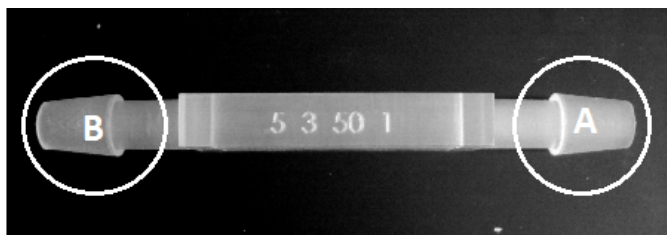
Each coupon has an identifying mark on the side that indicates dimensions.
